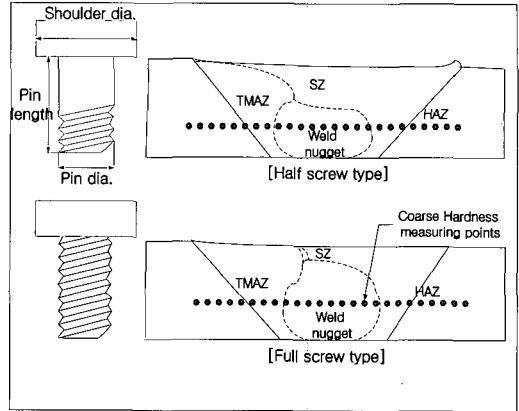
Vickers hardness measuring position of welding zone on Butt-jointed specimen by pin of full screw type and half screw type
